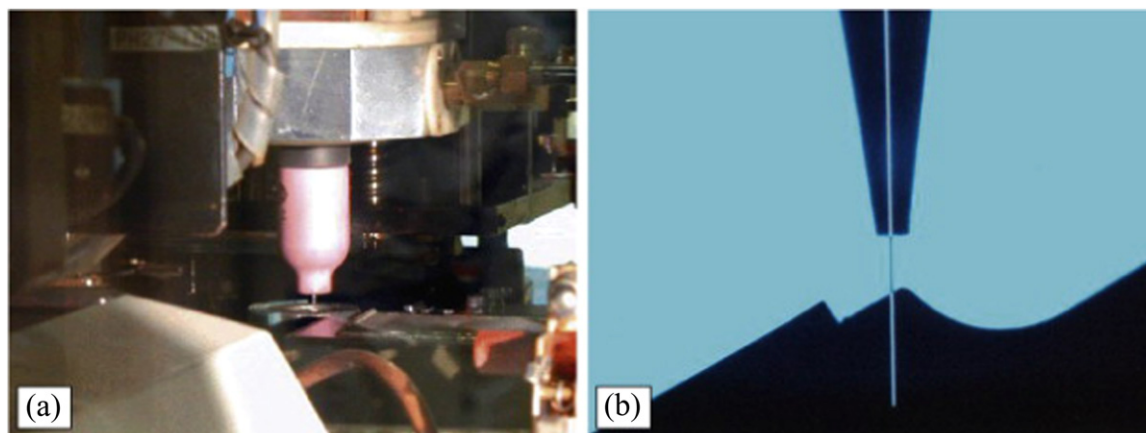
Photographs of (a) a welding torch and (b) an image display showing the position of the weld electrode.
